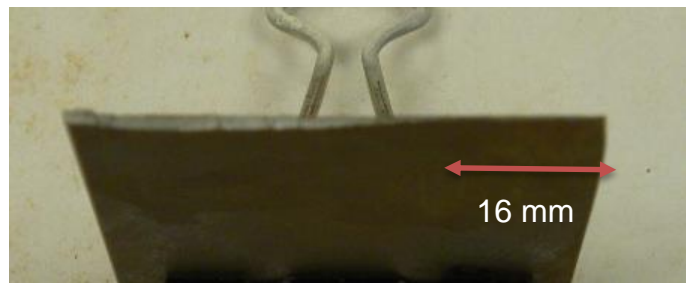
Photo of fracture surface of sample F20 (80%)
